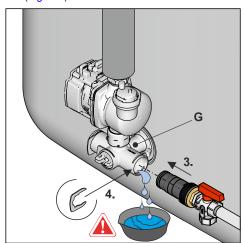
Installing the combined filling and draining filling connection in the connection bracket
